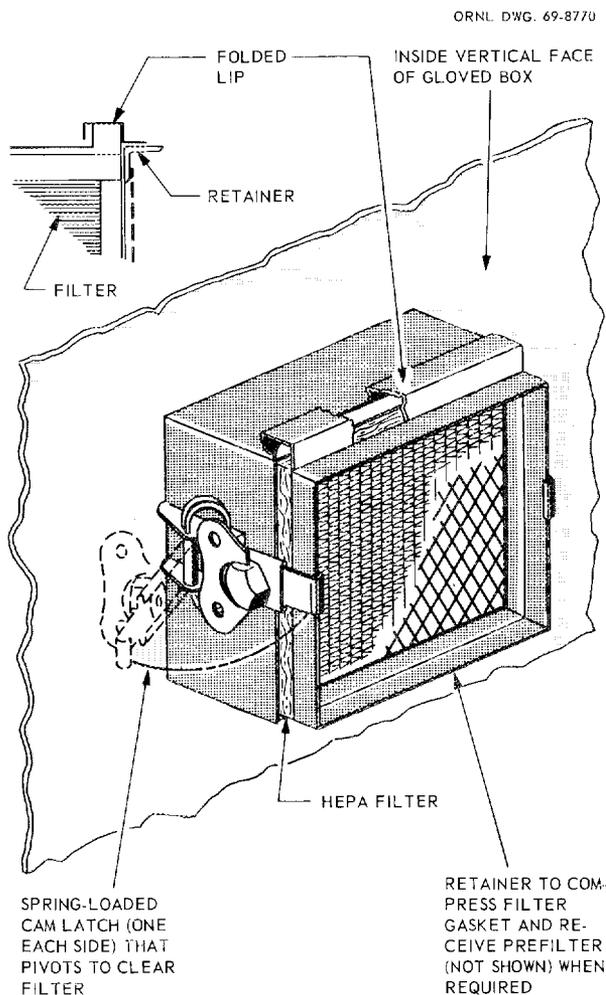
Inside gloved box open-face HEPA filter mounting arrangement with cam latches.
